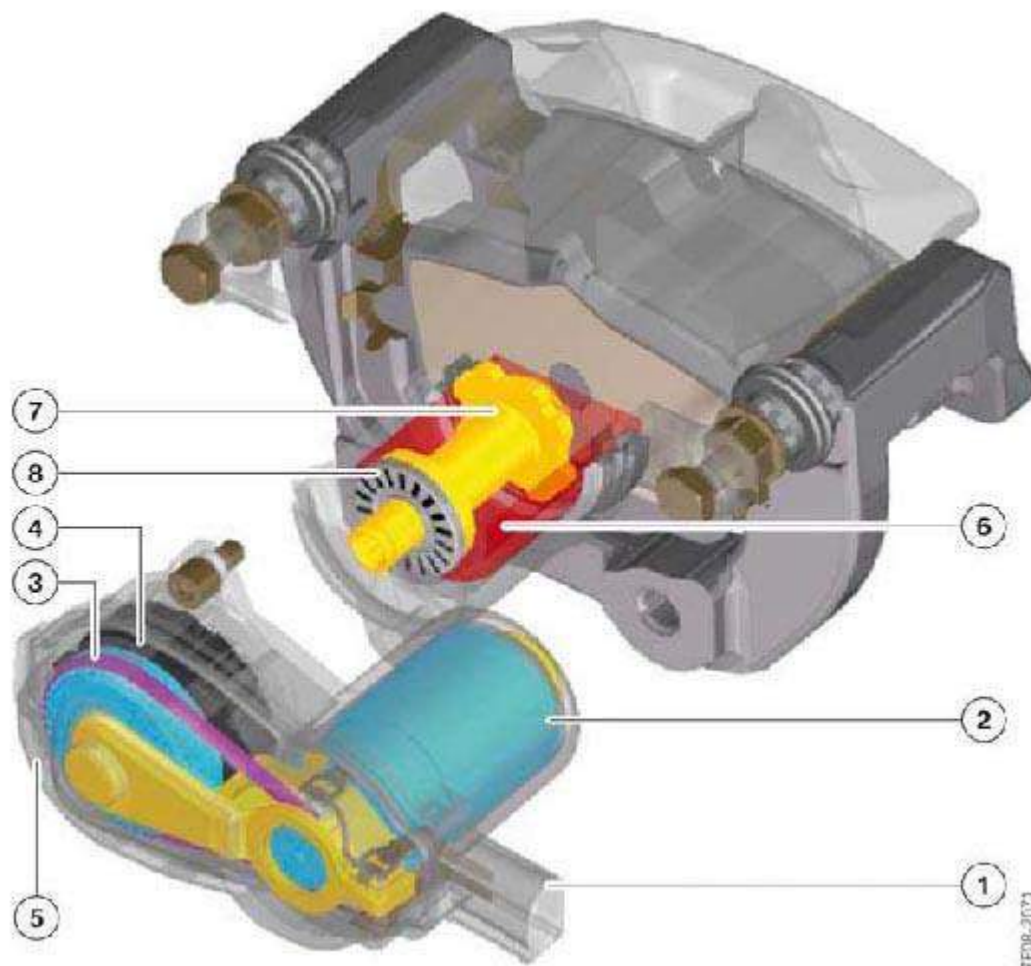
F10 Overview Of EMF Actuator With Brake Caliper
